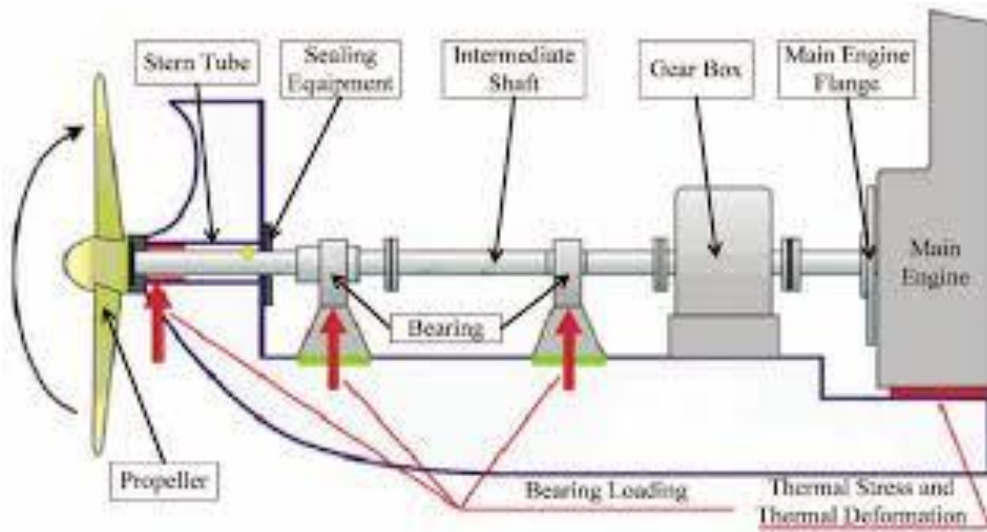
Gear box, propeller shaft and propeller arrangement at a glance.
